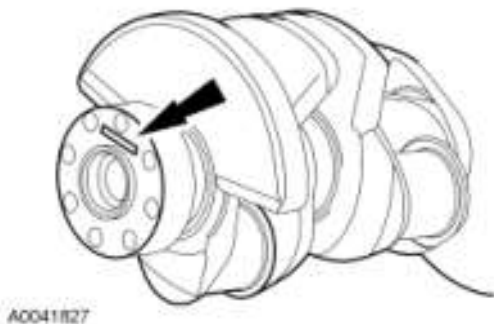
Identifying Main Bearing Code - Found On Back Of Crankshaft
